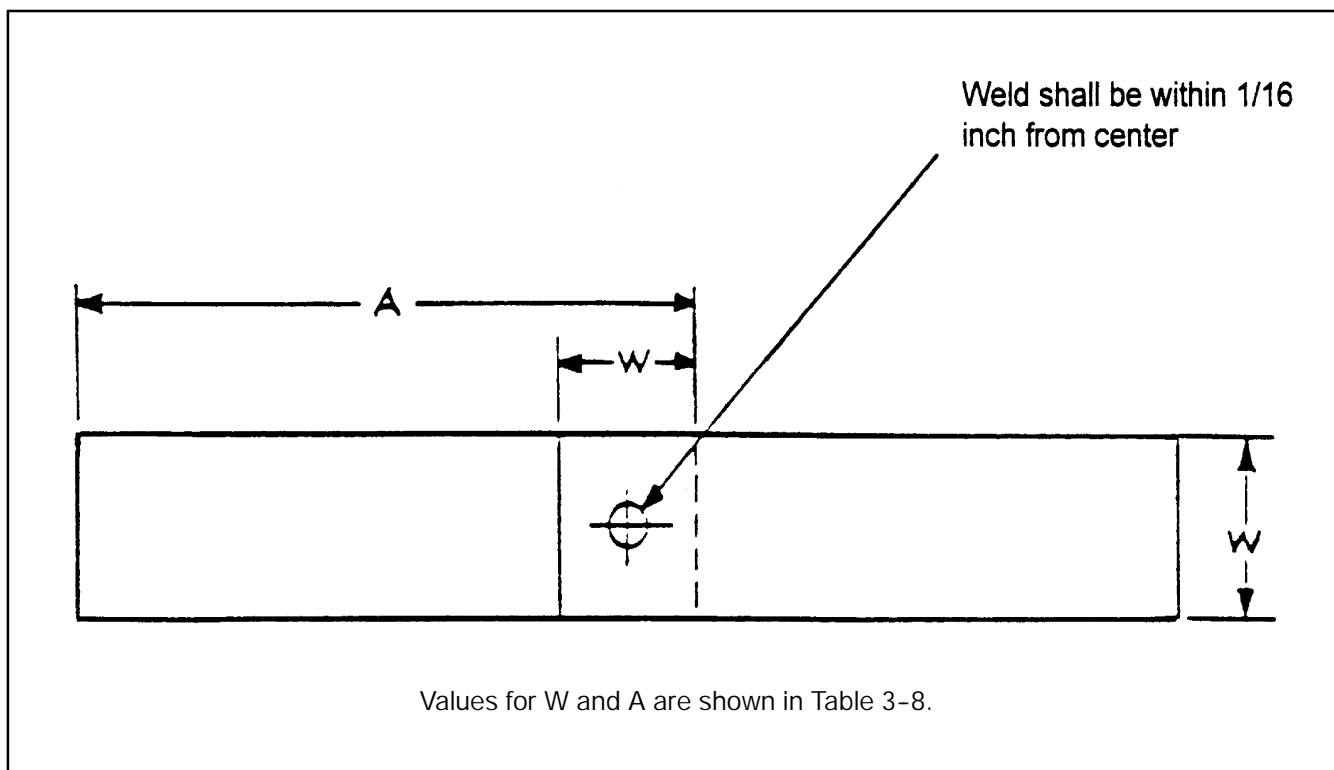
Multiple Spot Shear Specimen (to be cut after welding) (Sheet 2 of 2)
